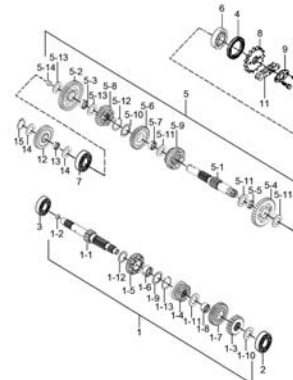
GEAR SHIFTING (P12-S160-0003)
